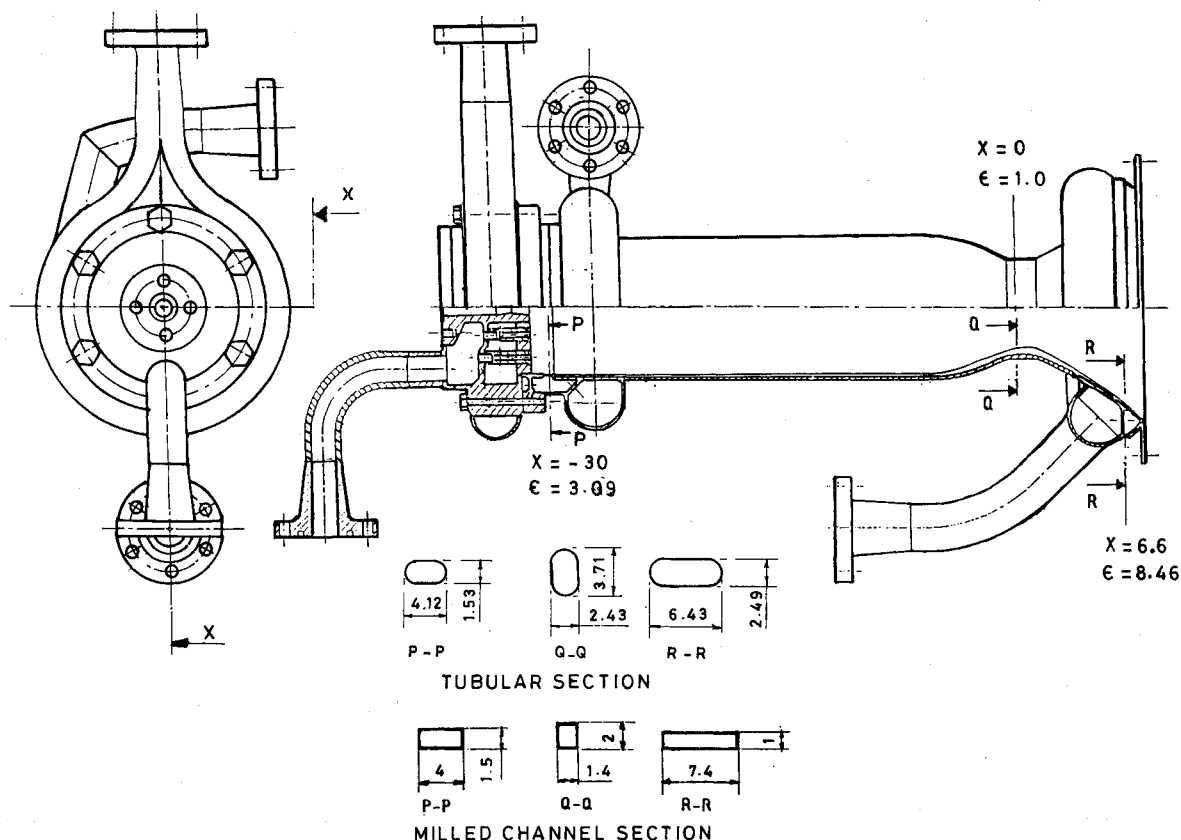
Thrust-chamber configuration giving coolant-passage dimensions.
